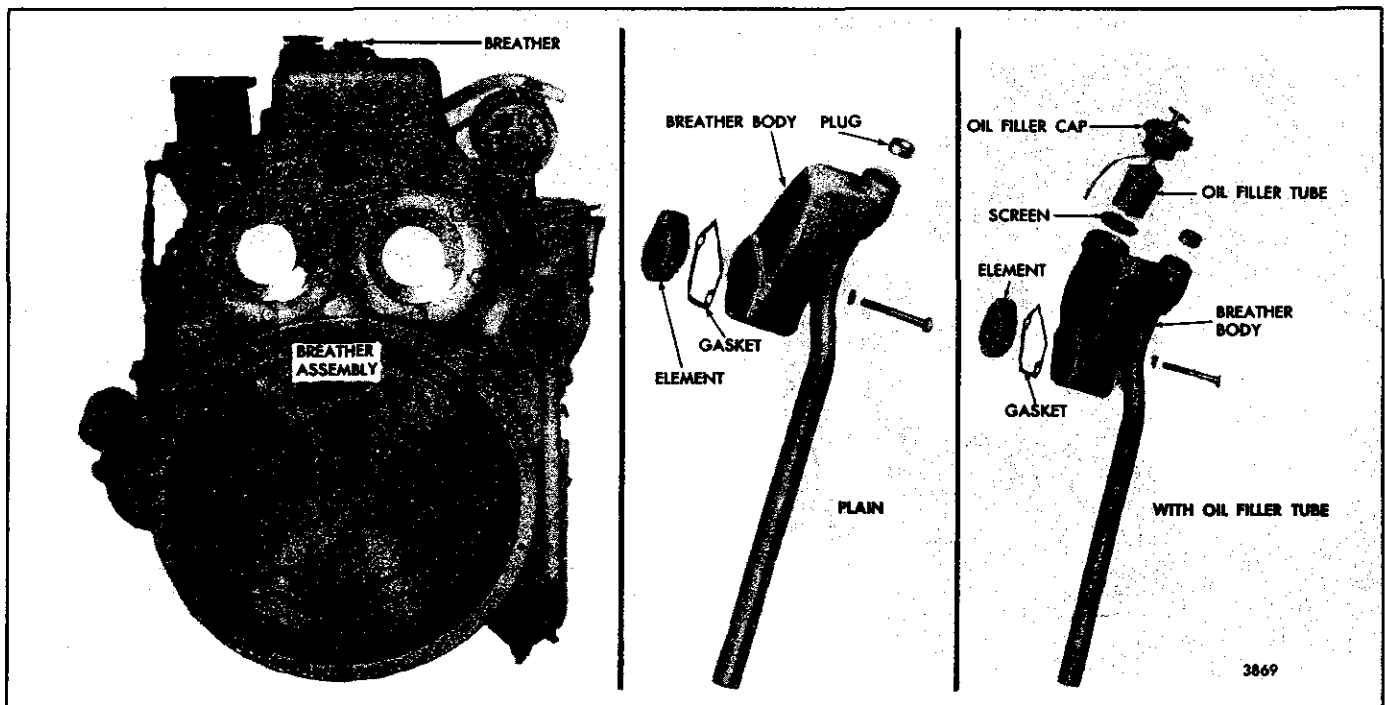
Crankcase Breather Mounting and Details (In-Line Engine)
